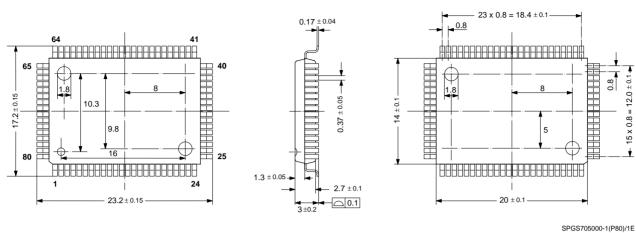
80-Pin Plastic Quad Flat Pack (PQFP80) Weight approximately 1.61 g Dimensions in mm
